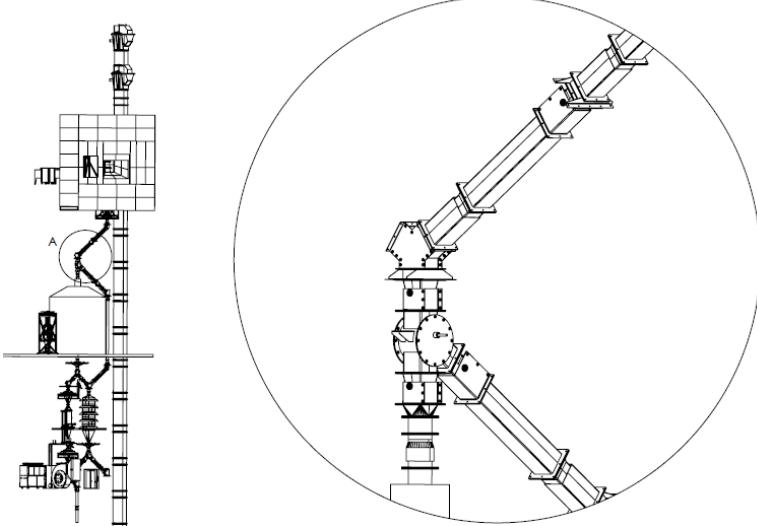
Detail drawing of G3P3 ductwork segment above hot storage bin (K. Albrecht)
